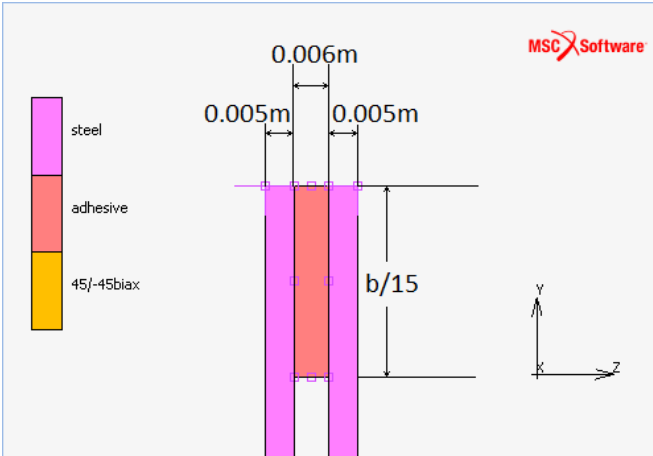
Transversal YZ view of the clamp/adhesive dimensions.
